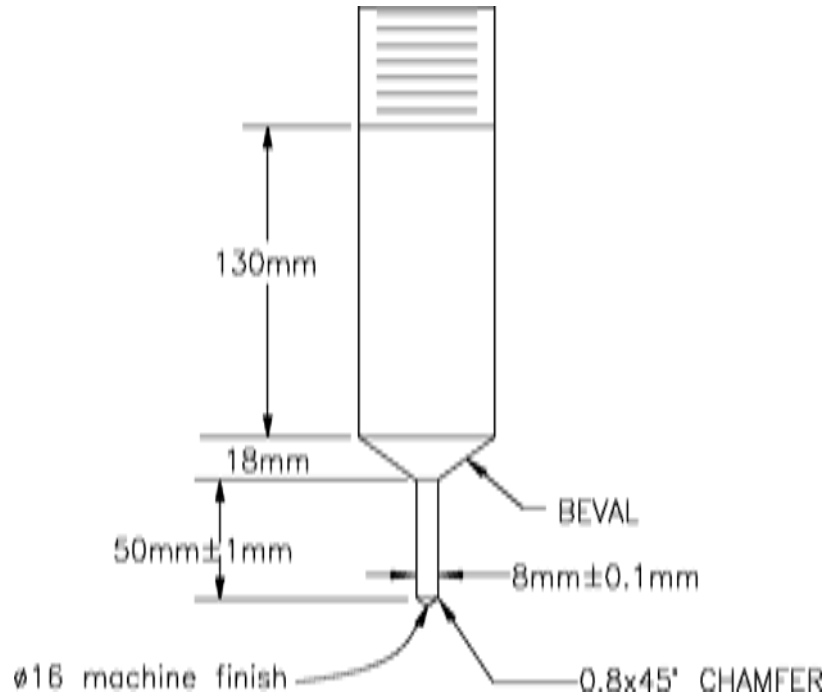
TEST PROBE DETAIL (NOT TO SCALE)
